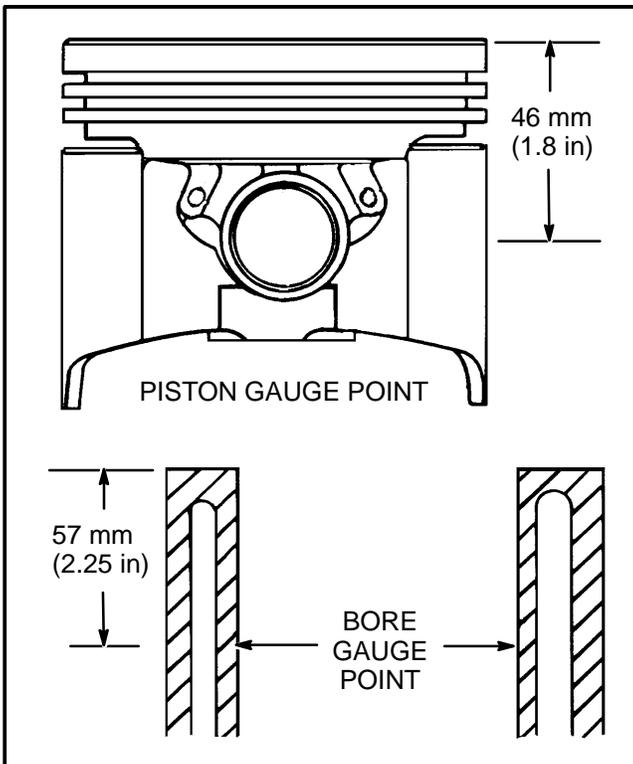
GAUGE POINTS FOR PISTON AND CYLINDER BORE
